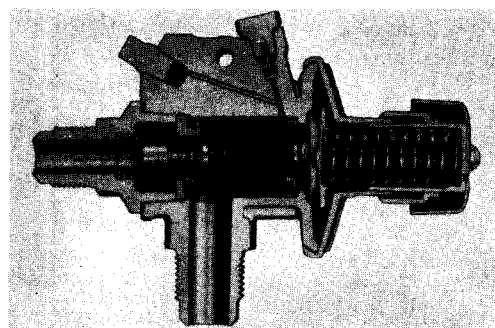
Throttling-type evaporator pressure regulator. (Courtesy Controls Company of America.)
